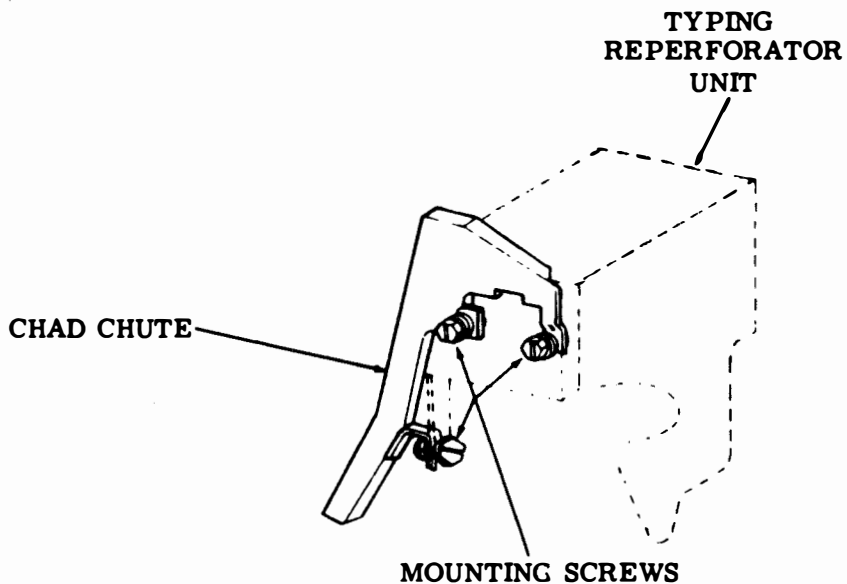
Chad Chute for Self-Contained Typing Reperforator Set (Left Side View)
